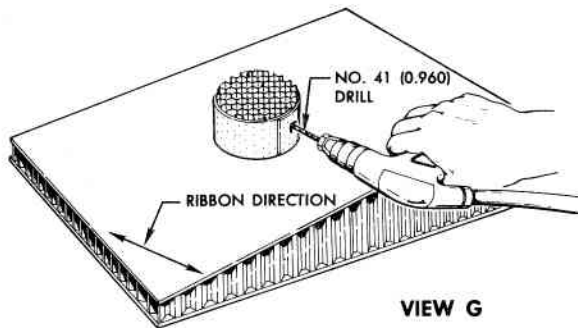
Honeycomb Repair No. 2 — Hole (Sheet 1 of 3)
